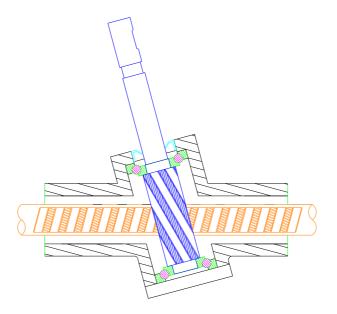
Helical rack and pinion steering gear with tilted pinion axis.
